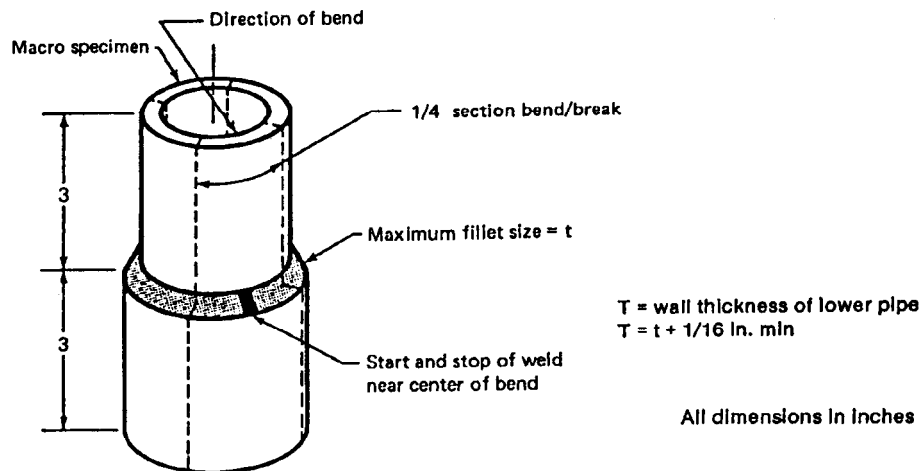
Alternate Fillet Weld Test Weldment, Pipe
